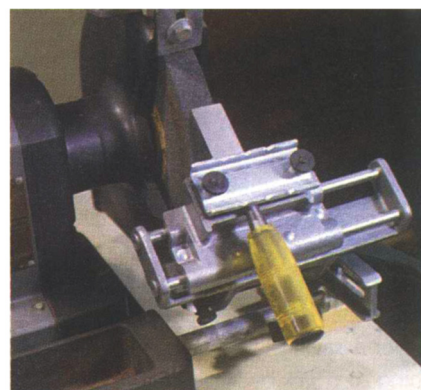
The grinding attachment can be adjusted to tilt the blade to almost any angle to the grinding wheel.
